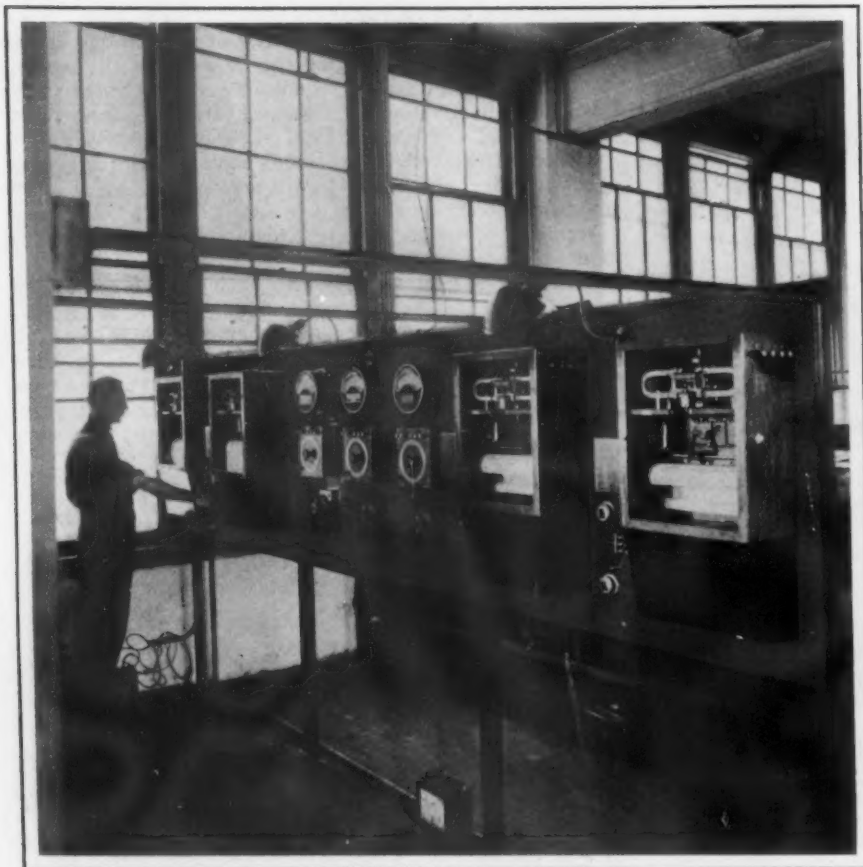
Indicator and Recording Board from Which the Furnace Control is Handled, Operator in Constant Attendance
